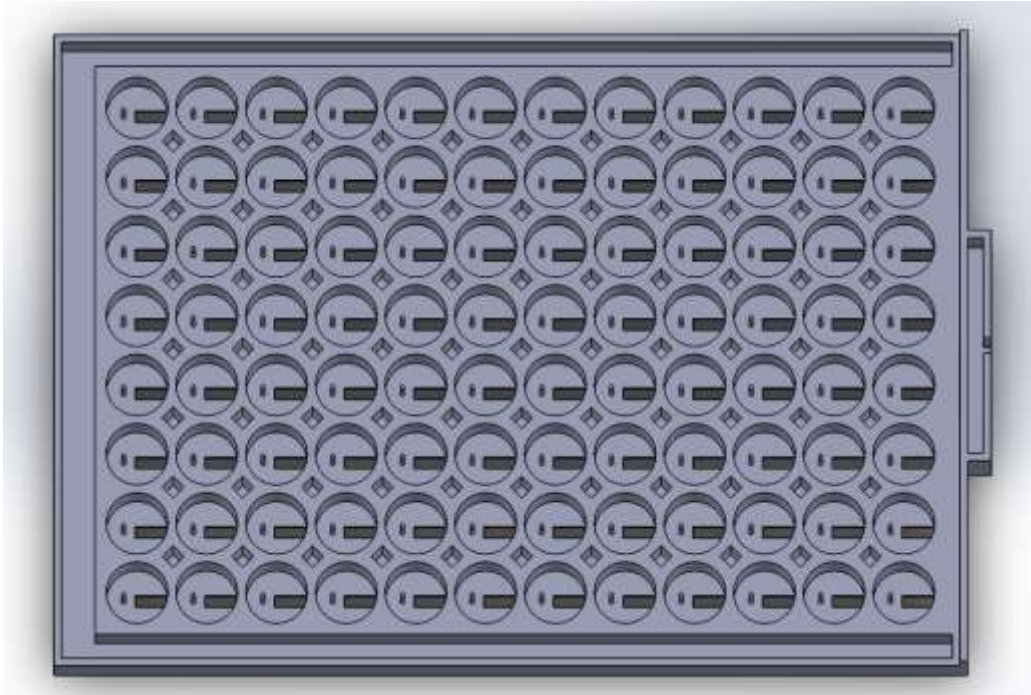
Top View of Top Plate showing the outer channel and diamond holes to counter act buoyancy.
